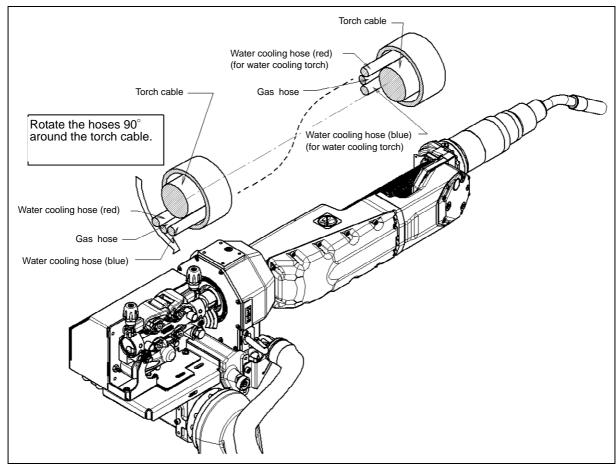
(k) Arrangement of the cables and hoses
